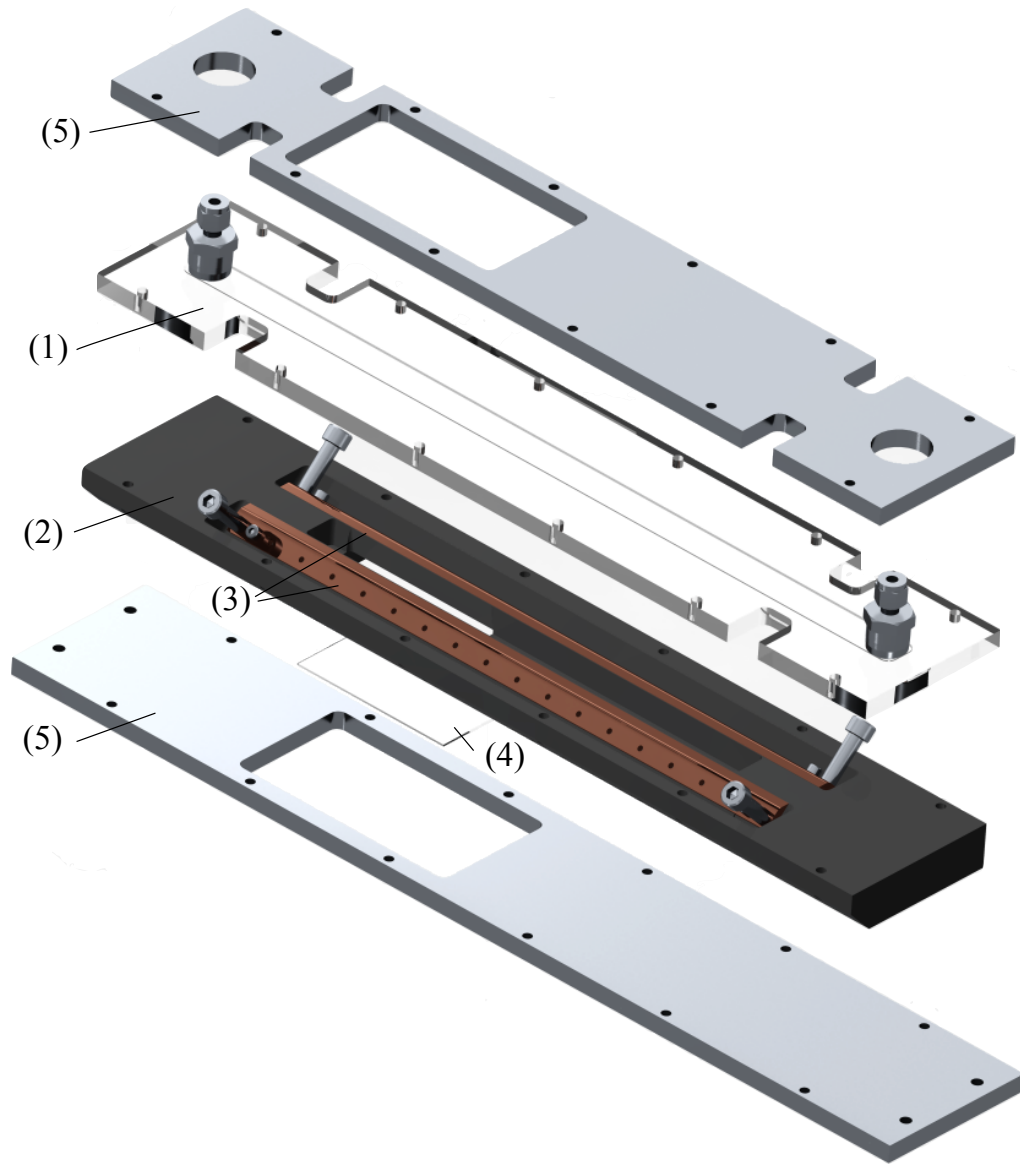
Exploded view of test section, containing (1) channel plate, (2) heater support plate, (3) electrodes, (4) IR glass, and (5) aluminium supports.
